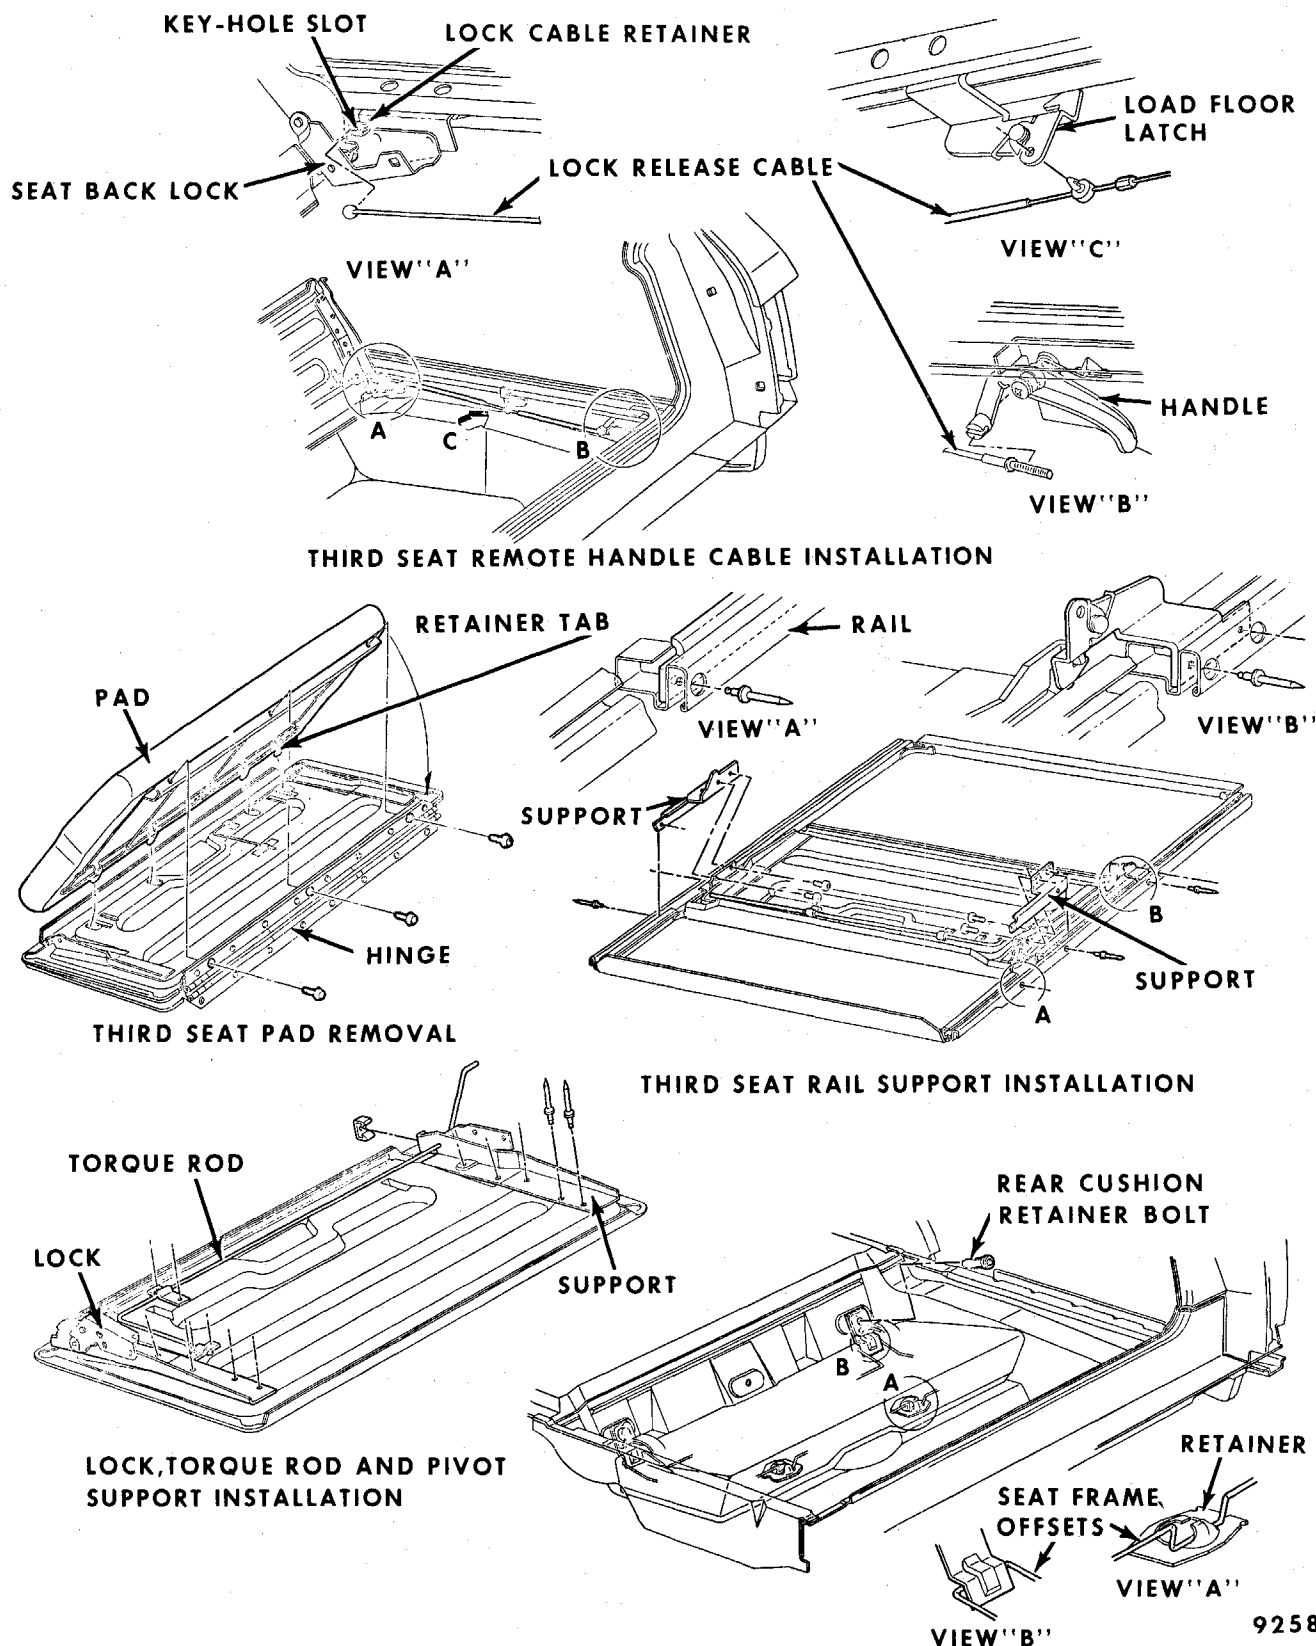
Third Seat Cushion and Back Installation - "B" Body Three-Seat Station Wagons
